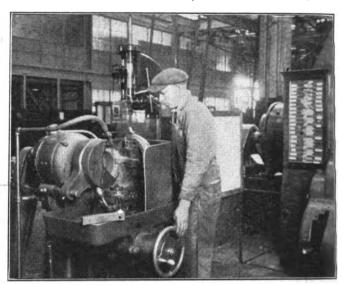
Gisholt Tool Grinder Used for Sharpening Standard Lathe,
